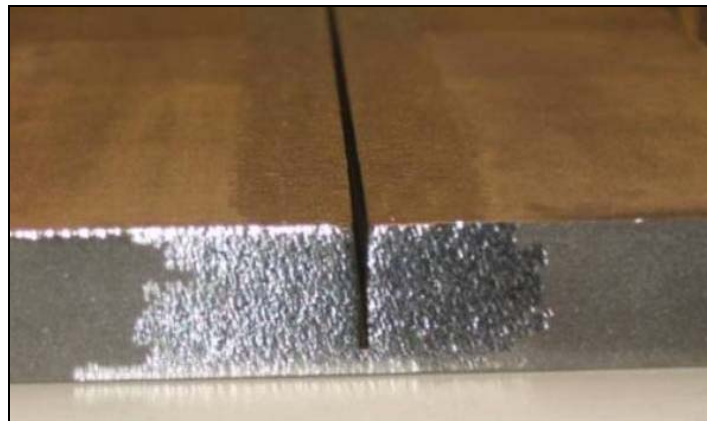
Enlarged view of the machined groove in the braze test plate.
